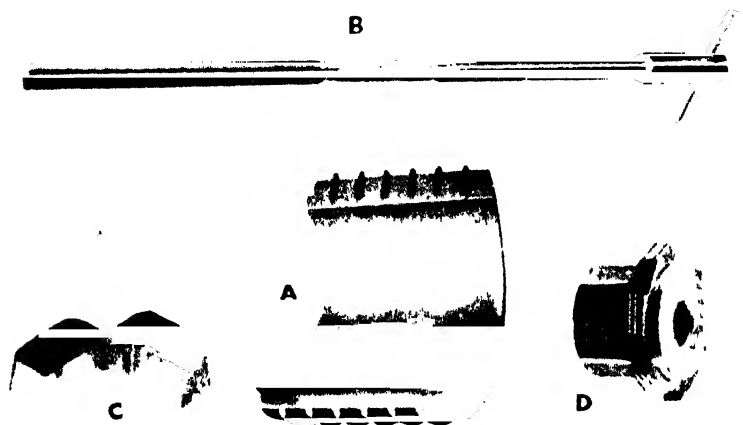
EXAMPLES OF WIMET TIPPED TOOLS
